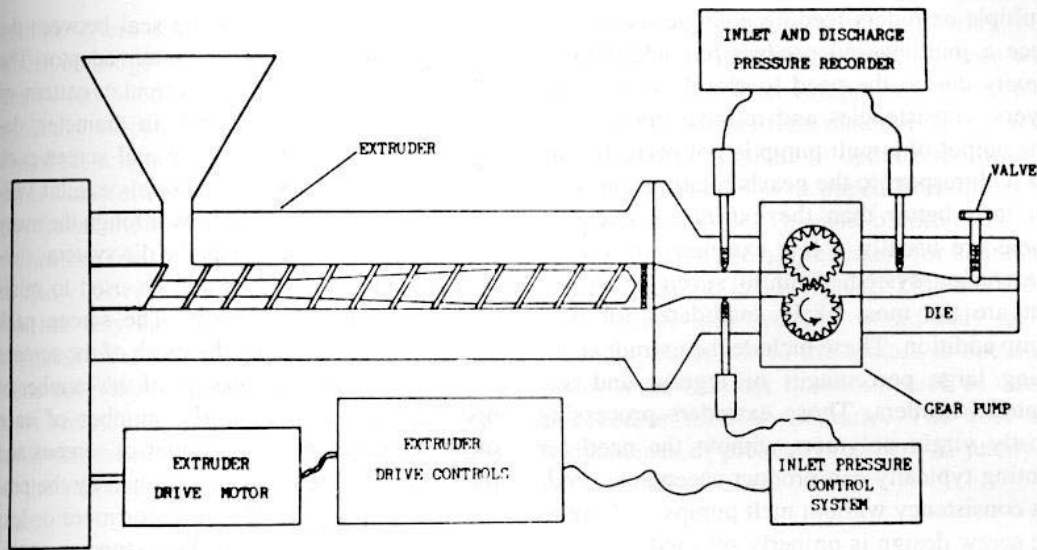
Extrusion line with melt pump. (Courtesy Davis-Standard)
